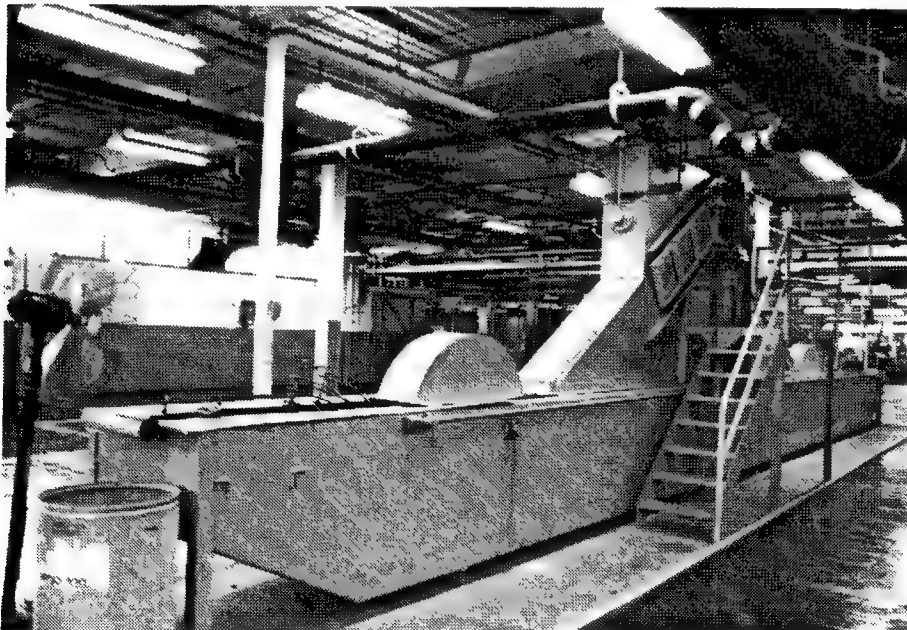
Building 3: This Wetproof Testing Machine, or "Submarine," manufactured by George Koch & Sons, is used to test the wetproof seal on ammunition cans.
